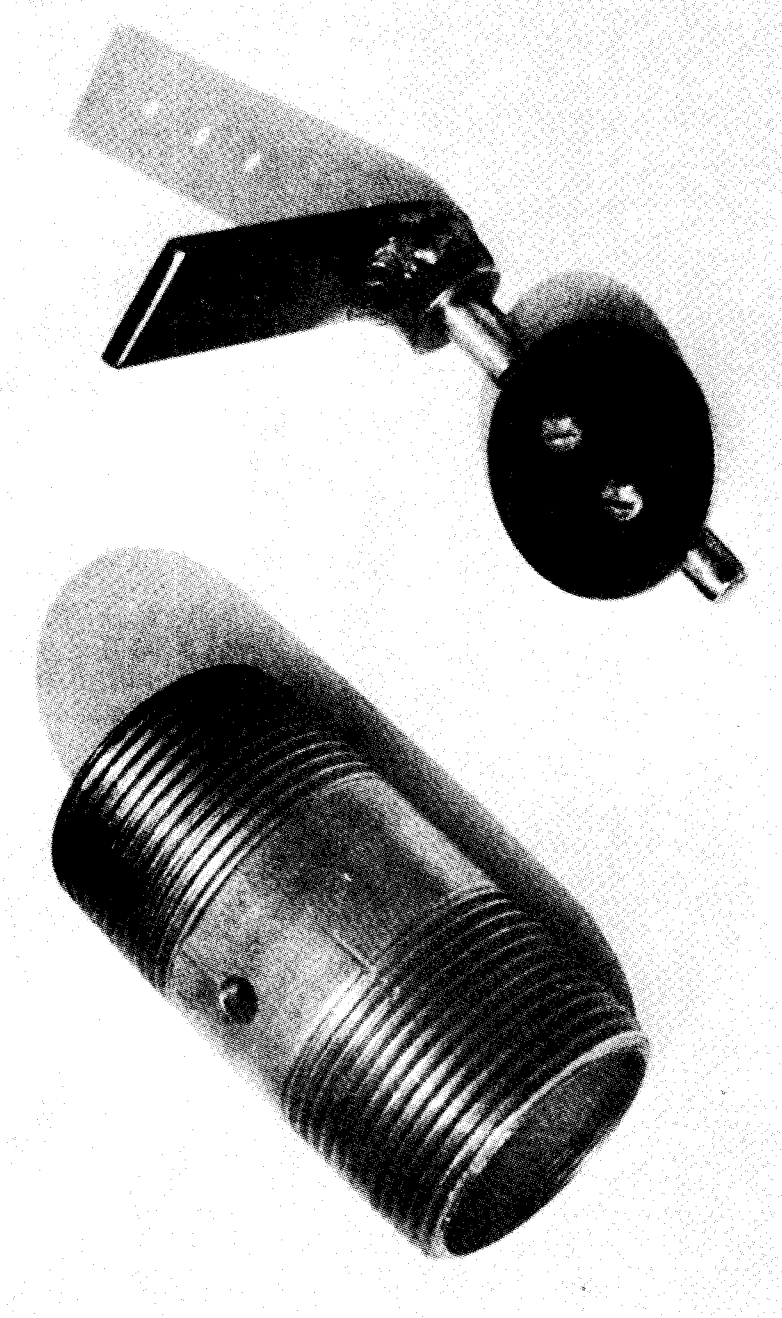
Butterfly valve assembly. Note that the valve has been assembled outside of the valve body for clarity.
